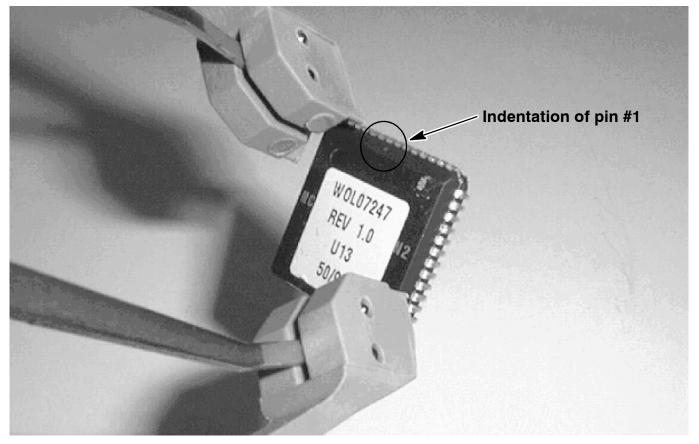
Shaved 45° Edge and Pin #1 Indentation
